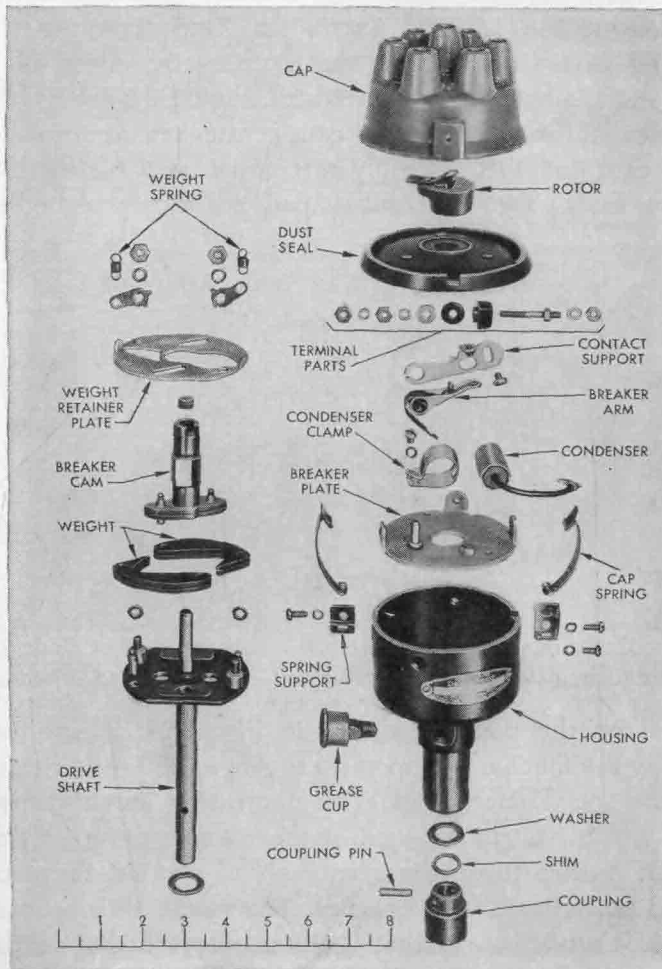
Disassembled view of a distributor. Advance mechanism is to left. (Delco-Remy Division of General Motors Corporation)
